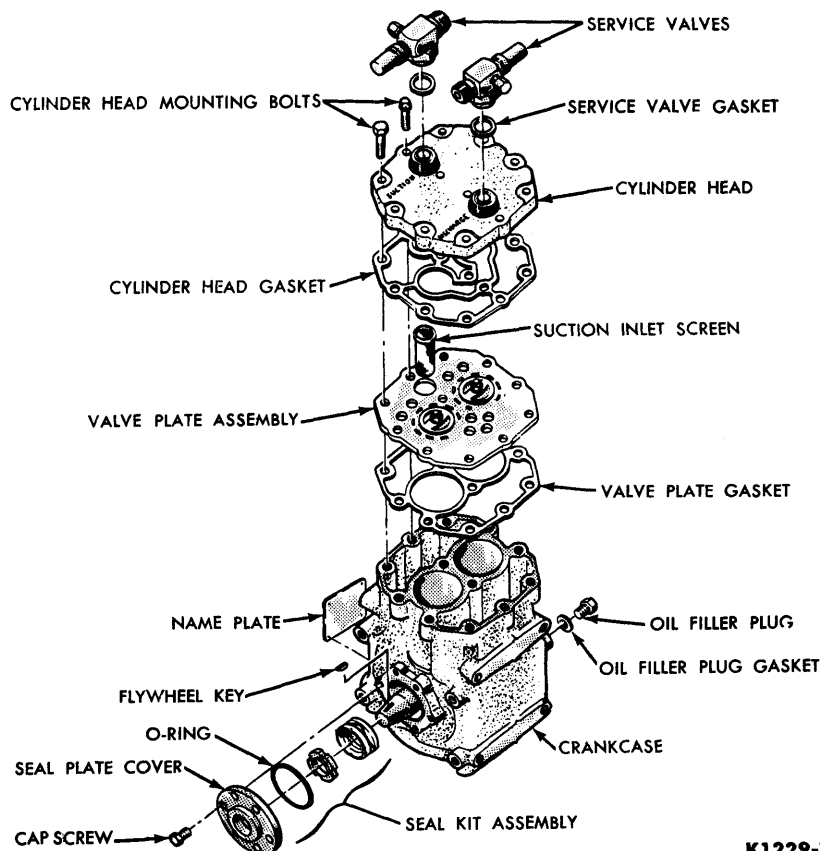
Tecumseh Cylinder Head and Valve Assembly
